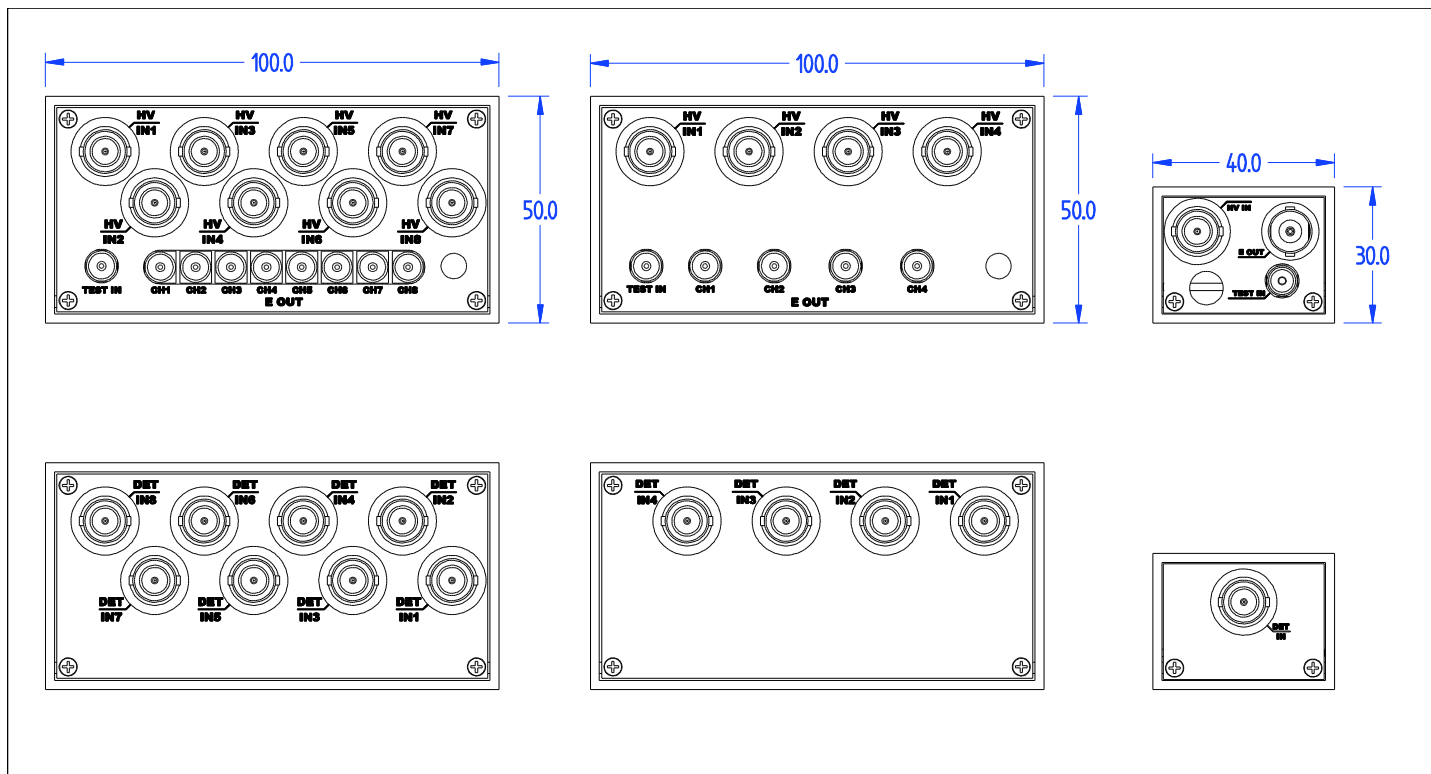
A1422 series Front and Rear panel 8ch, 4ch, 1ch (dimension: mm)
